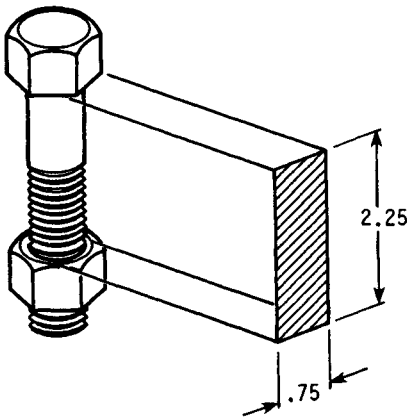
The bearing area of a bolt. The dimensions given are those used in the example in the text for the joint shown in Fig. 22.2. Dimensions are in inches. Multiply by 25.4 to convert to millimeters.
